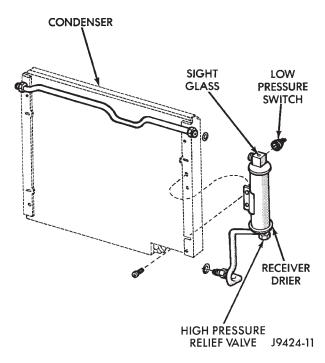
Condenser Filter Drier—LHD 2.5L Engine
